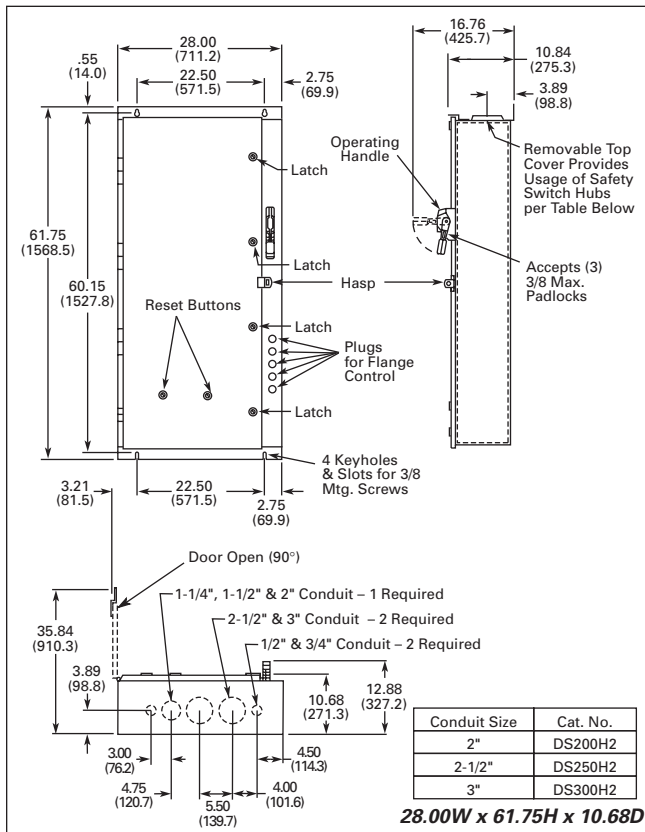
Box E, Type 3R — Approximate Dimensions in Inches (mm)
